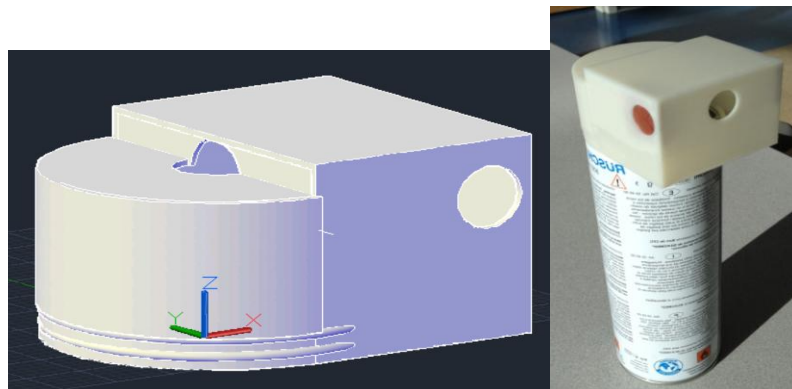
Second prototype of the enclosed box design. On the left is the Auto CAD drawing and on the right is the physical model attached to the silicone spray can.
